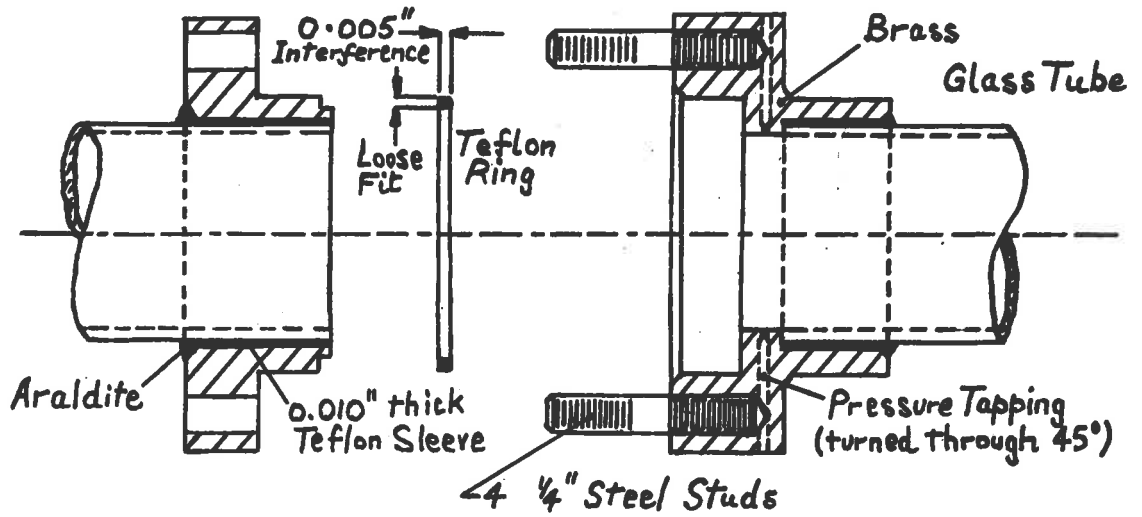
CROSS-SECTION OF THE TUBE SOCKET JOINTS
